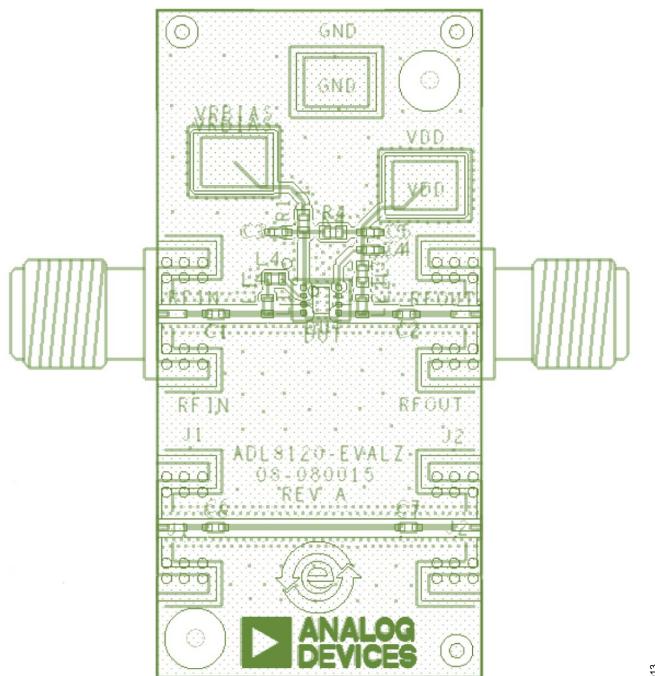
ADL8120-EVALZ Assembly Drawing (J1 and J2 Not Installed)
